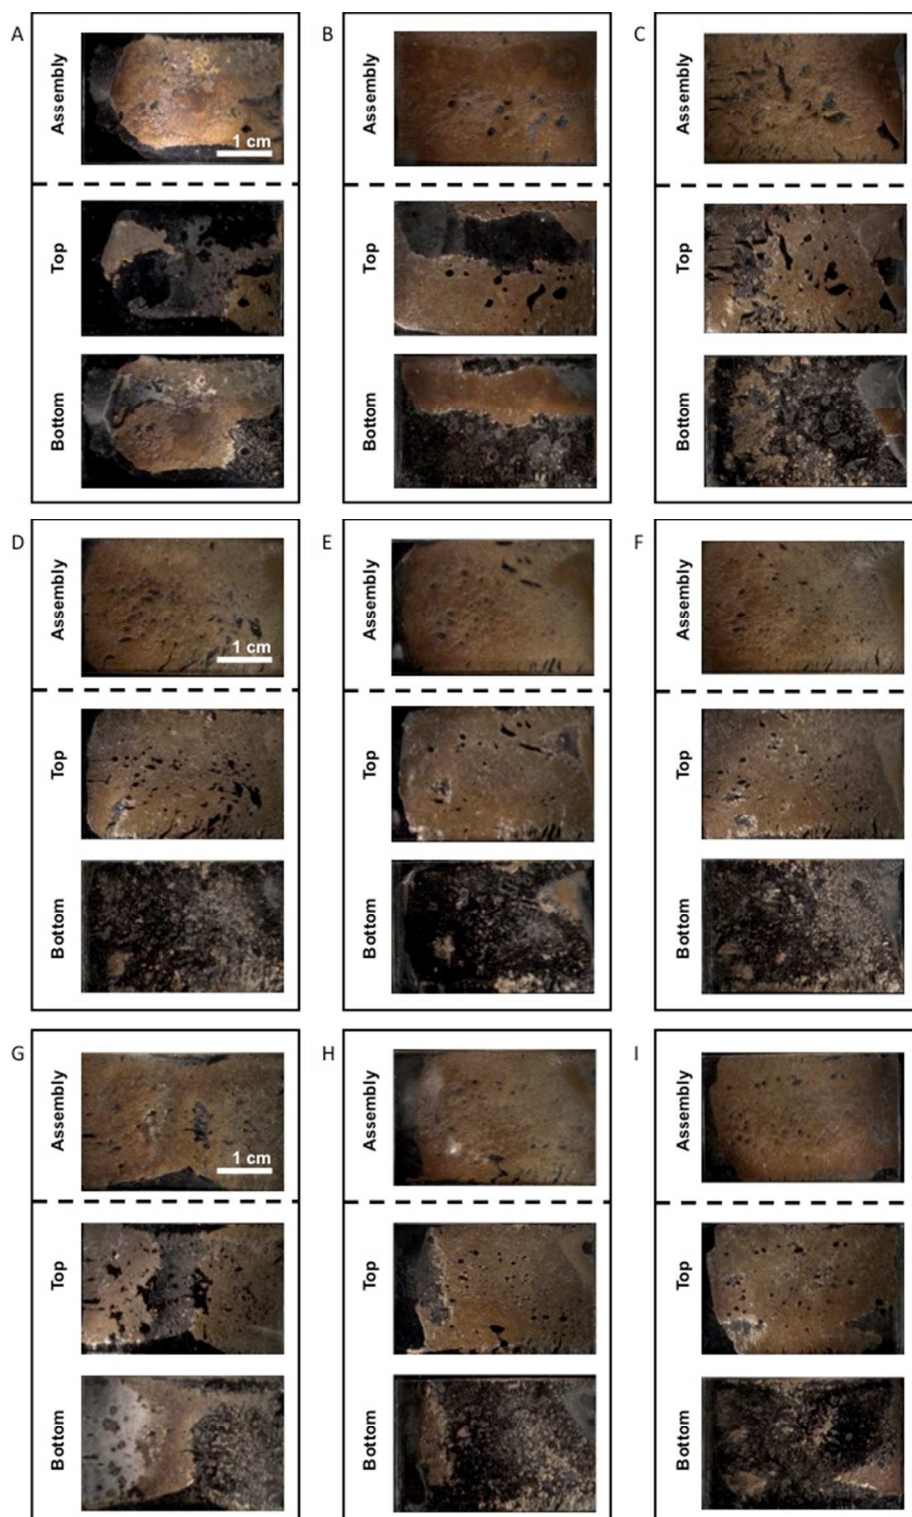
Optical micrographs of  $C_{10}H_8(OH)_2$  R1OH/R1F samples before (Assembly) and after (Top, Bottom) lap shearing. A-I) Samples exhibit primarily adhesive failure with cohesive failure.
